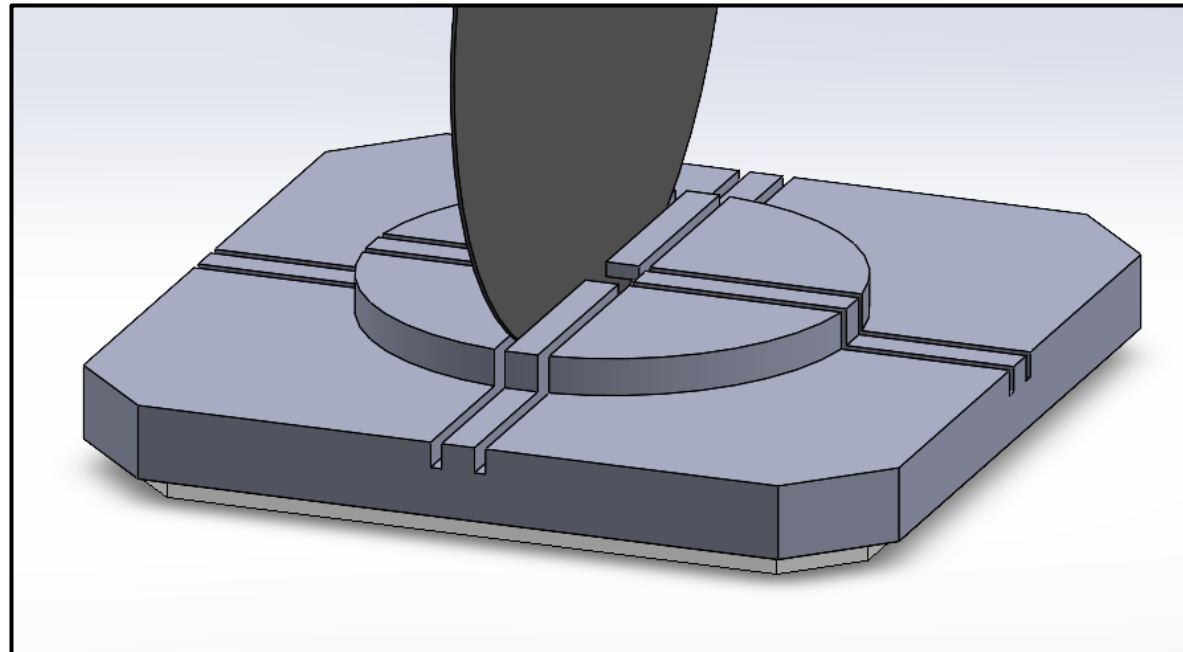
SolidWorks assembly of High Speed Precision Saw Fixture with a saw blade and glass cutting surface.
